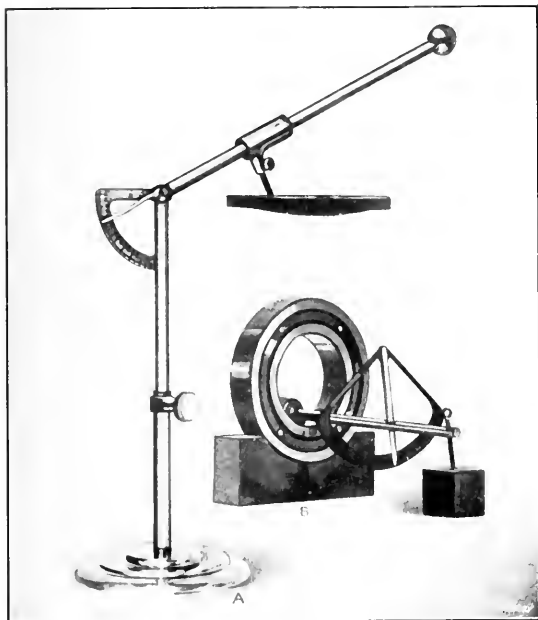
(A) Quadrant Sclerometer for testing Flat Surfaces
